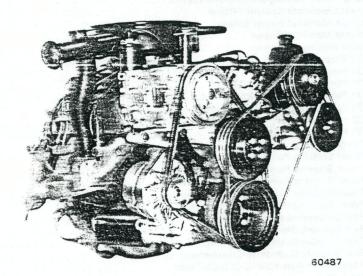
Typical Eight-Cylinder Engine Assembly
